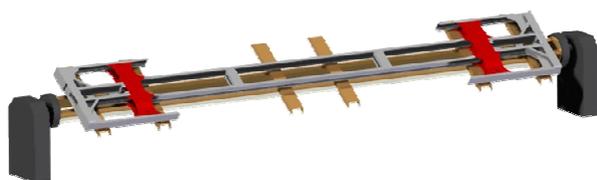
Positioning and clamping system for the process of final assembly of underframe
